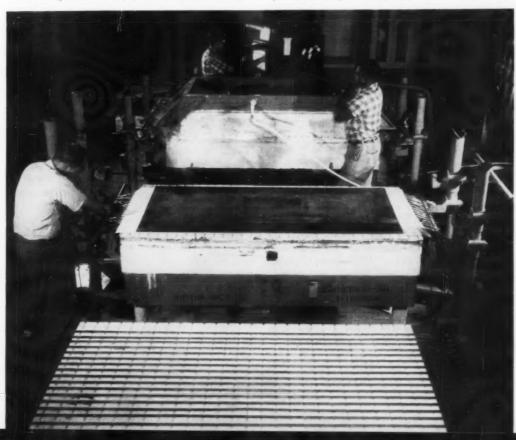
Structural Test Section of B-70 Wing Consists of Upper and Lower Panels of Brazed PH 15-7 Mo Panels and Sheet Metal Bulkheads
